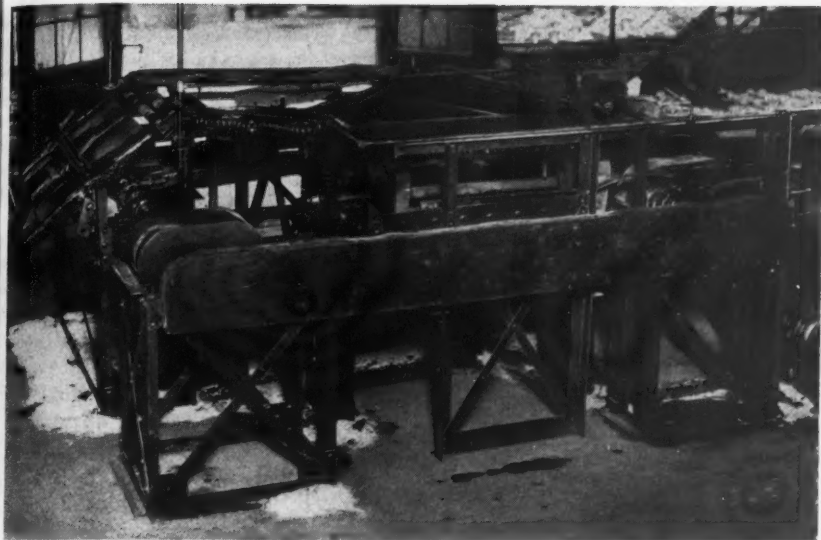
View at loading end of furnace, showing turntable conveyor handling pallets. At the left is the lifting mechanism; at the right, the pallets being loaded with forgings.
